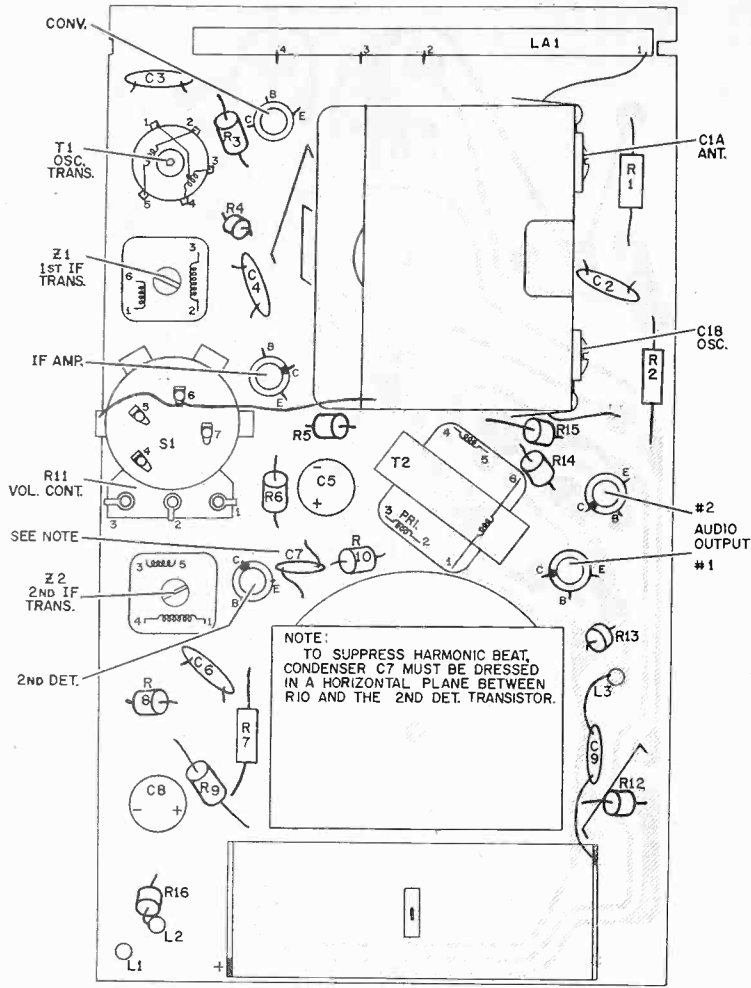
Printed Wiring Panel—Component Side Showing Parts Location and Alignment Points
